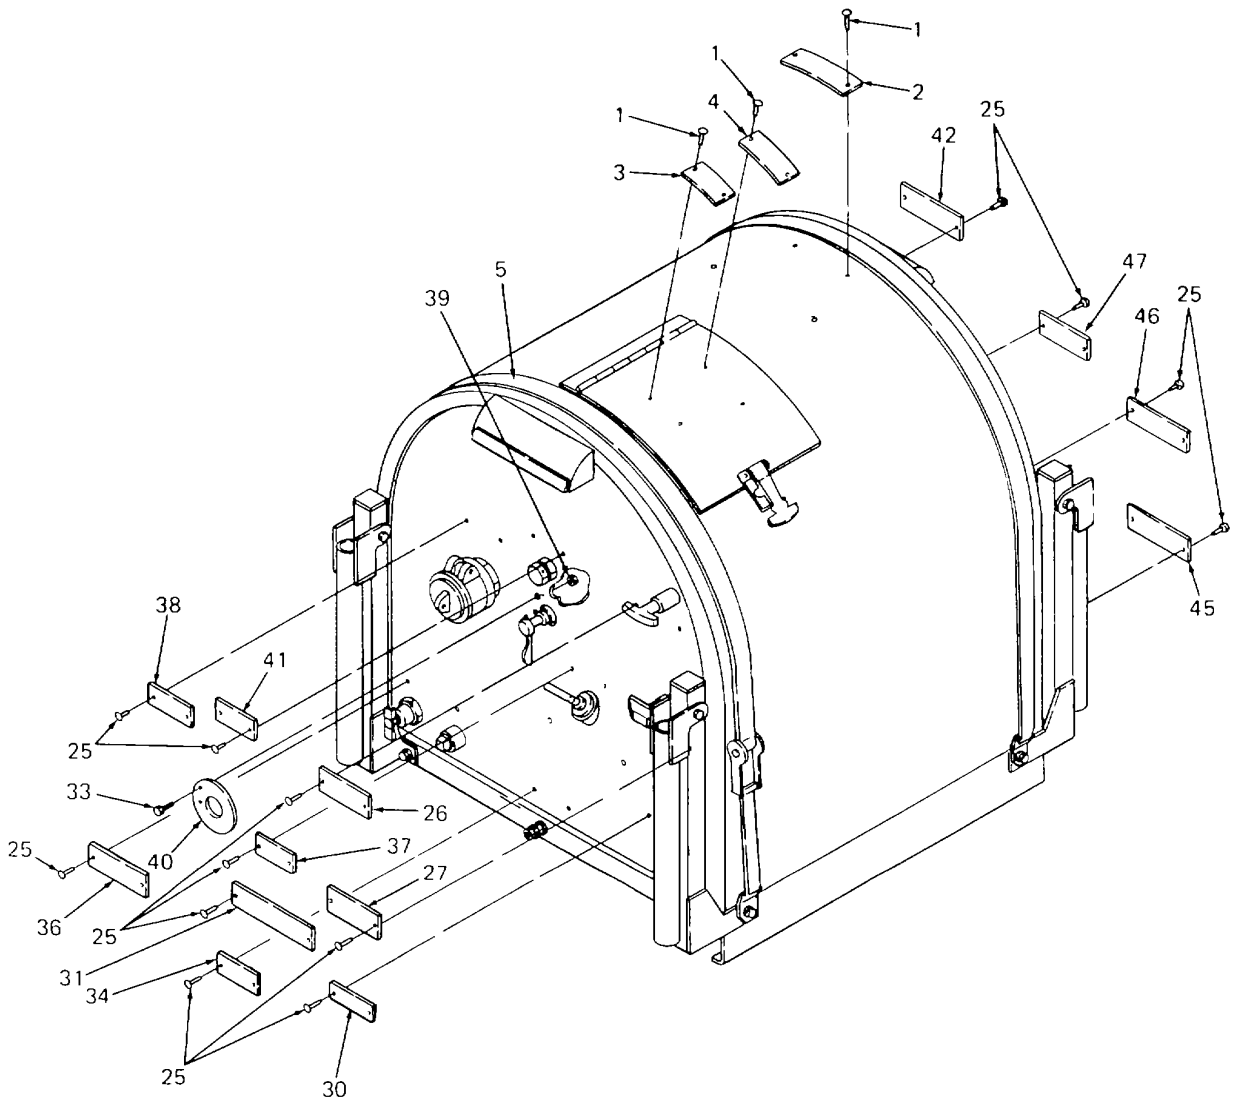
Centrifugal Pump (Sheet 1 of 2)
